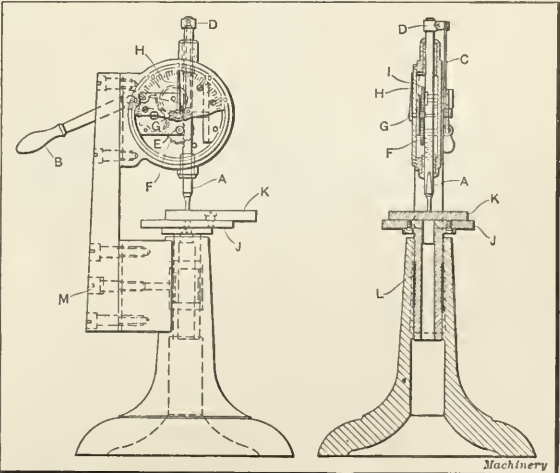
Sectional View showing Construction of Dial Indicator operated by Gears
